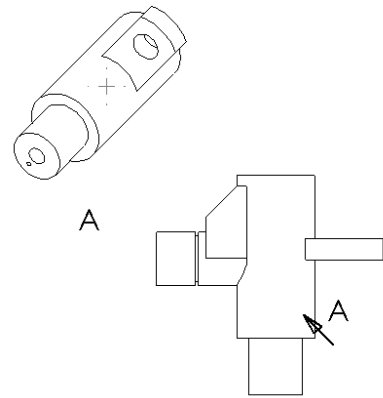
Reference edge to be selected to create the auxiliary view
